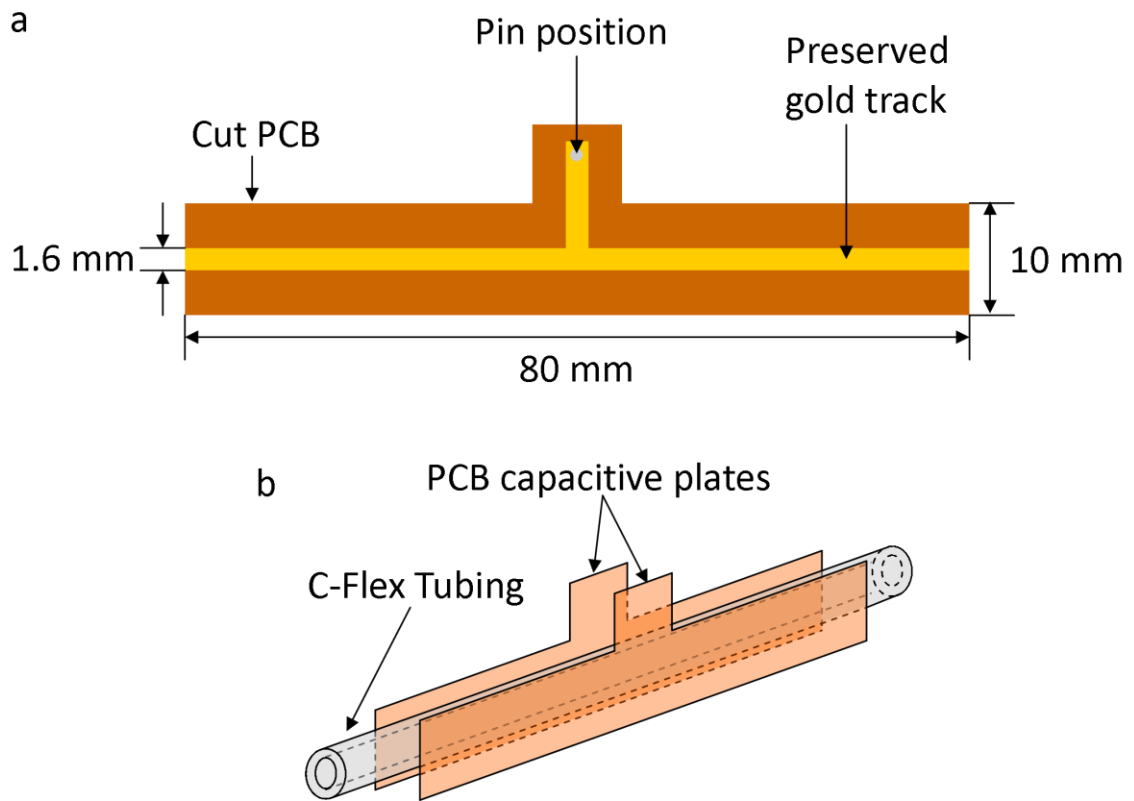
Details of PCB capacitive plates used in final test rig setup. (a) Plate dimensions and layout, including position of soldered pin placed through the PCB facing outwards from the gold strip, allowing connection to the rig electronics. (b) Positioning of plates to form the capacitor, with the C-Flex tubing internal bore (1.6 mm diameter) placed along the horizontal 80 mm gold strip on the plates. This arrangement was held together using a series of customised MSL-fabricated components. Two sets of plates containing the tubing were used, with one connected to the output of the micropump, and the other left dry as a reference device.
